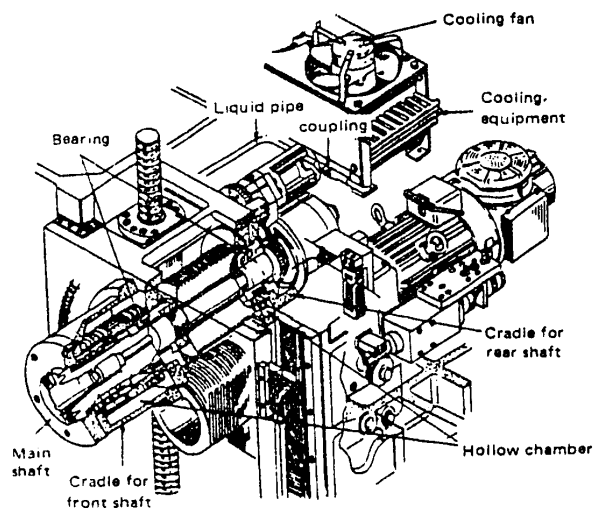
Structural Drawing of the Main Shaft Incorporating Heat Pipe
